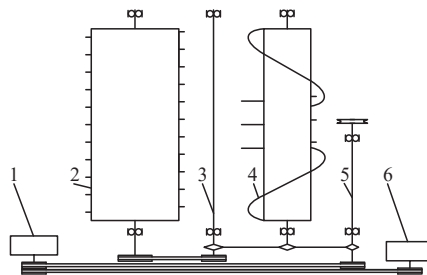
Schematic diagram of the DCH transmission system. 1. Wobble box of the lower cutterbars; 2. Reel; 3. Intermediate shaft of the reel; 4. Screw conveyor; 5. Driving shaft; 6. Wobble box of the upper cutterbars.
